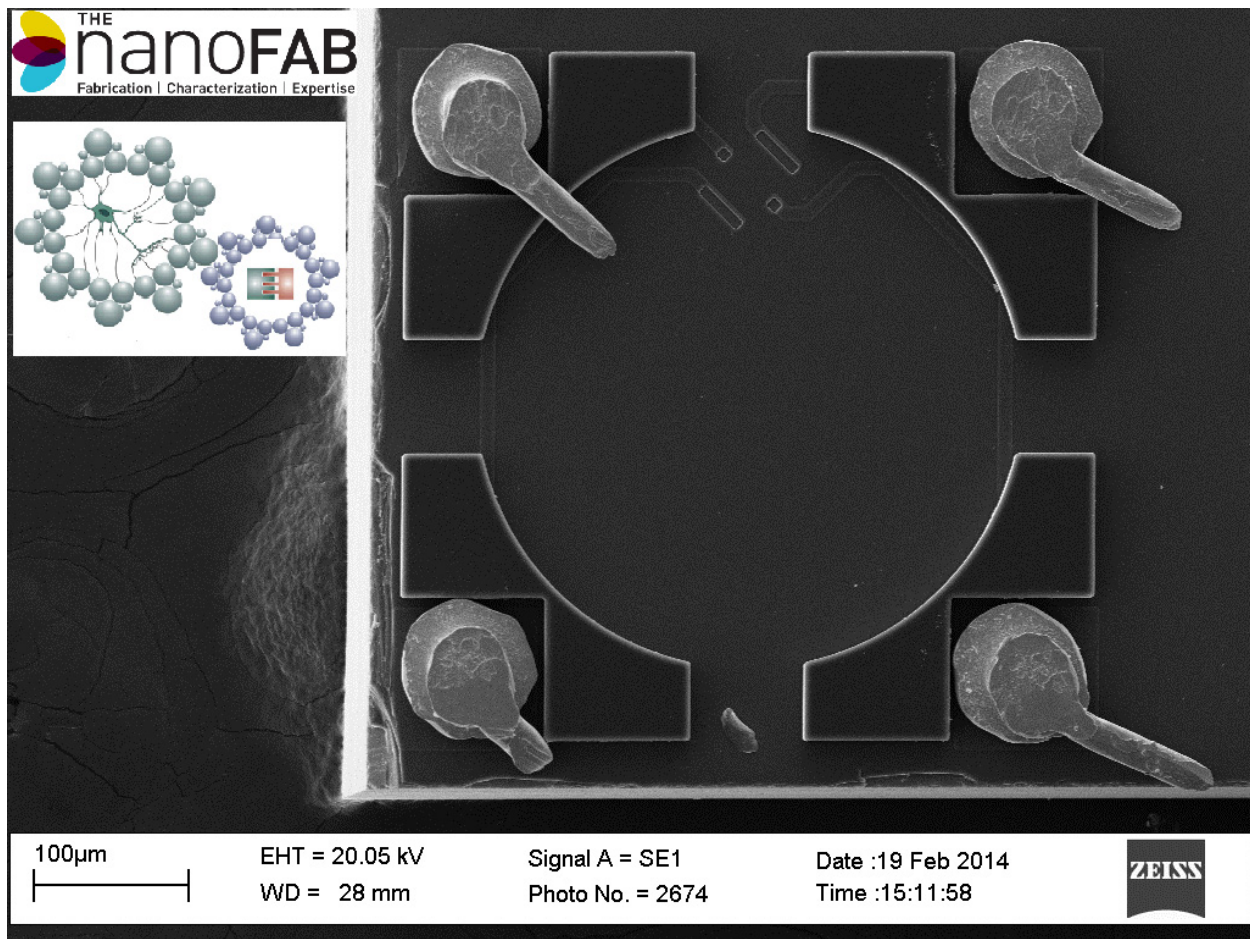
A device with four gold bumps on the pads (device size: 500um × 500um) ©
